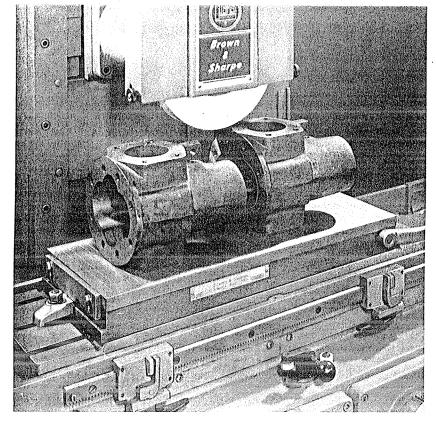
Accurate slot and sidewheel grinding operations are readily performed on these machines. The Radius and Angle Wheel Truing Attachment enables the operator to form the wheel to the required angle with ease and precision.
